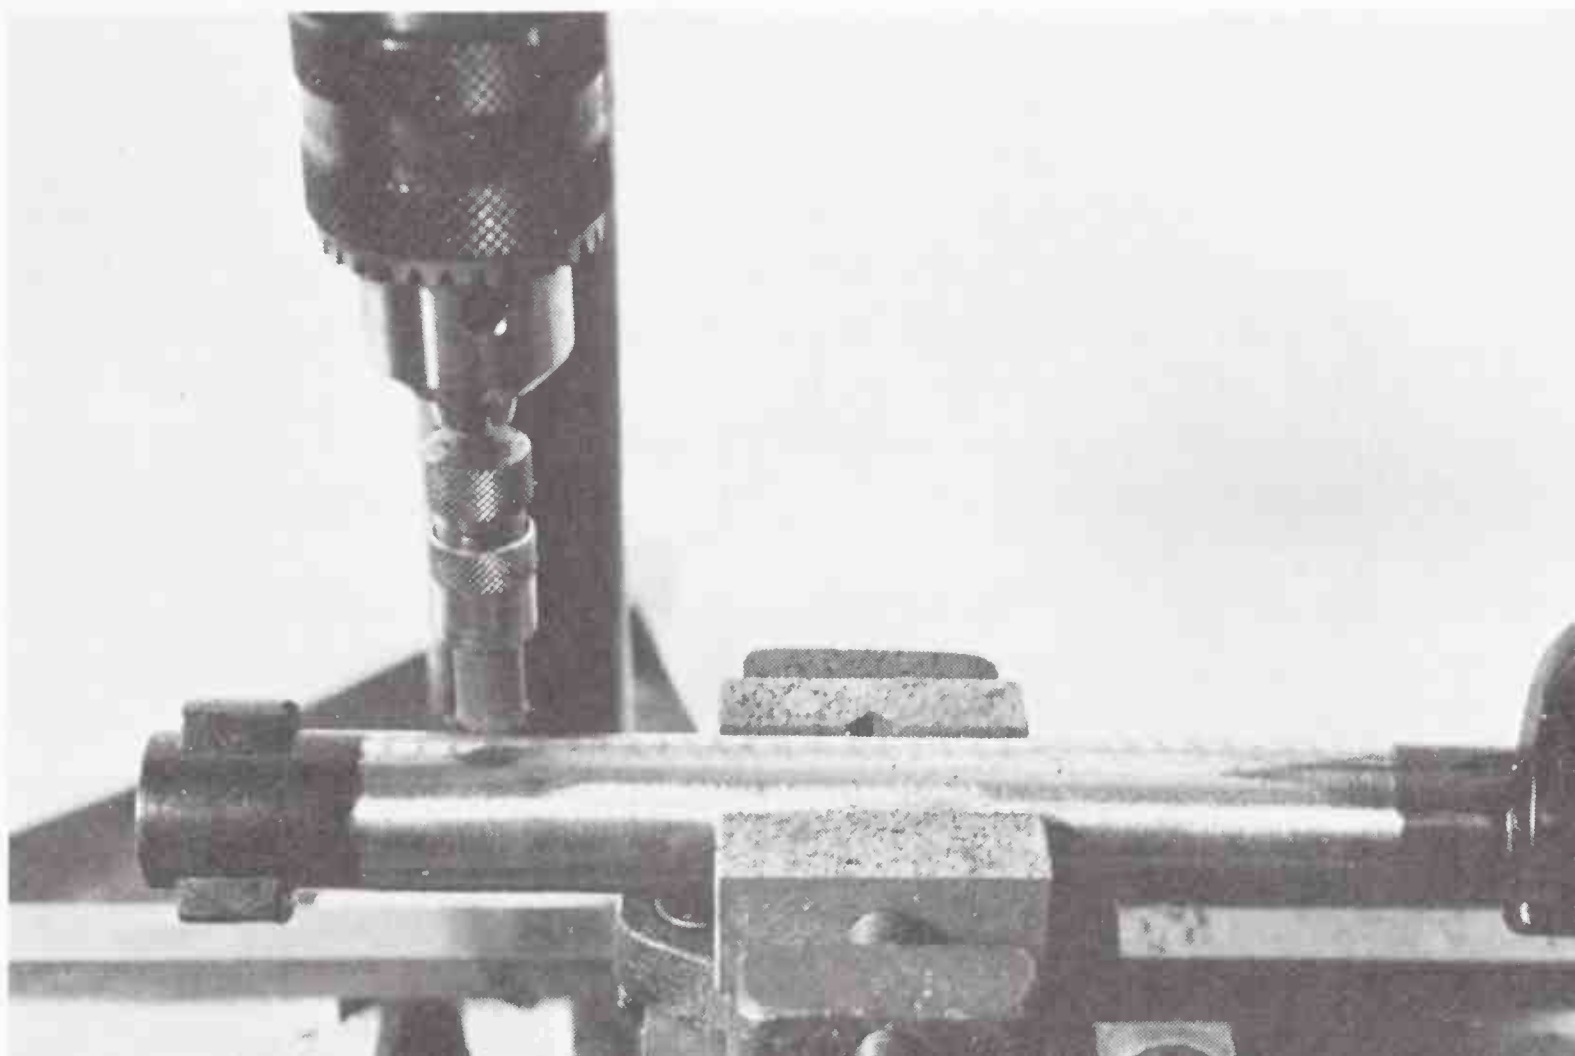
B-Square Jeweling Jig set up on drill press to jewel bolt for Springfield rifle.
